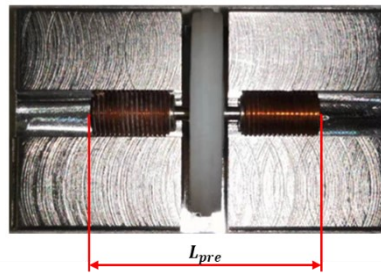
Length of the Bearing-Rotor Assembly in Axial Direction
